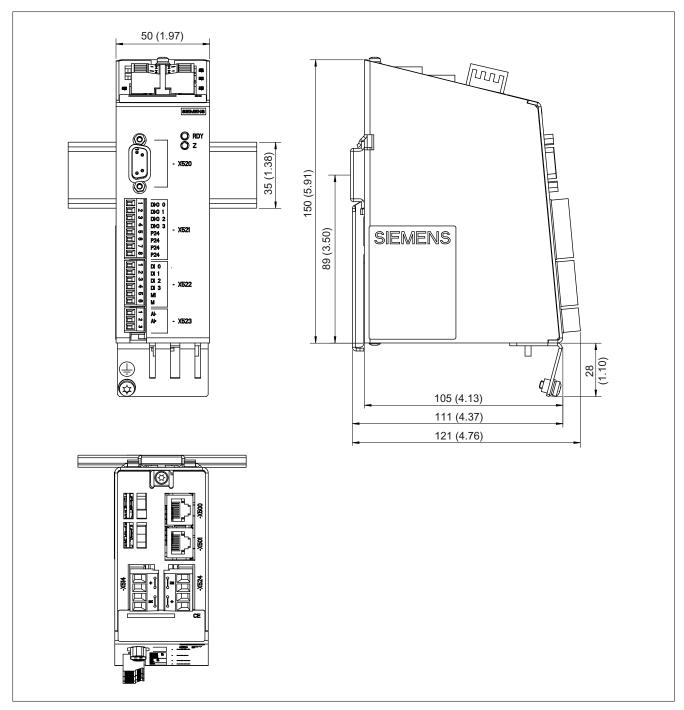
Dimension drawing of Terminal Module TM41, all data in mm and (inches)
